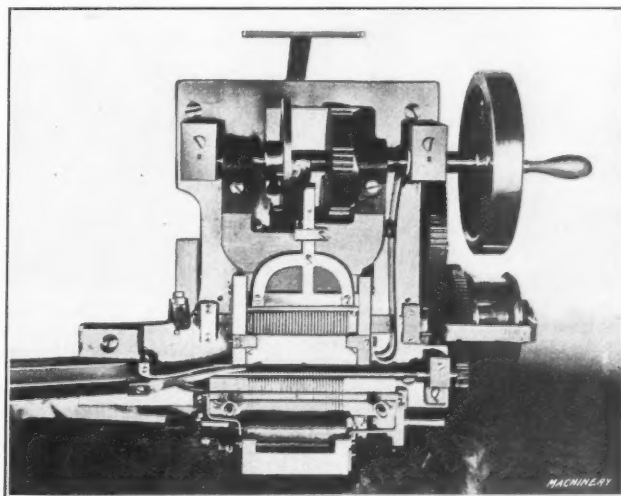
Top View of the Principal Part of the Pin-sticking Machine shown in Fig. 3
